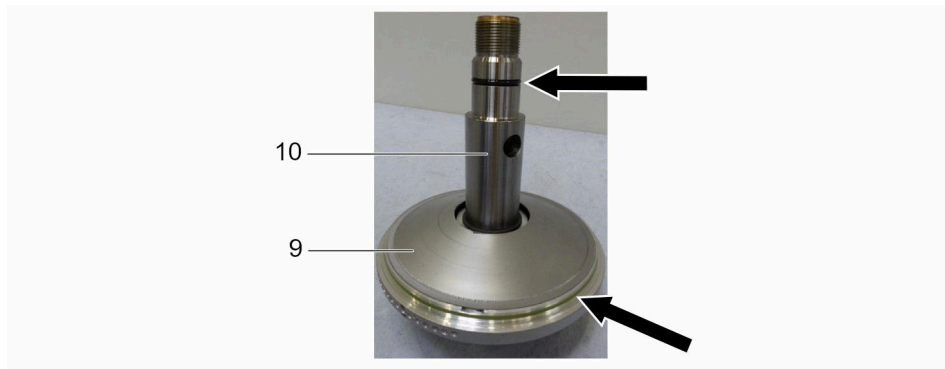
Deflector disk and seals on rotor base and bearing tube
